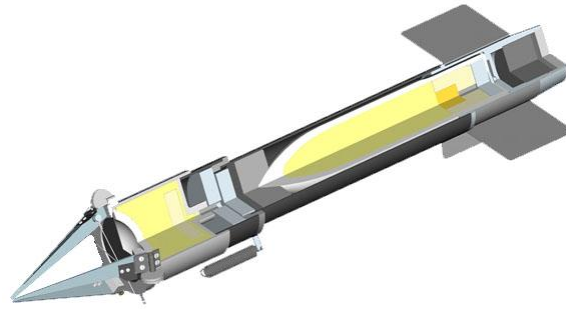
QinetiQ UAW tandem projectile (exploded view)³³
